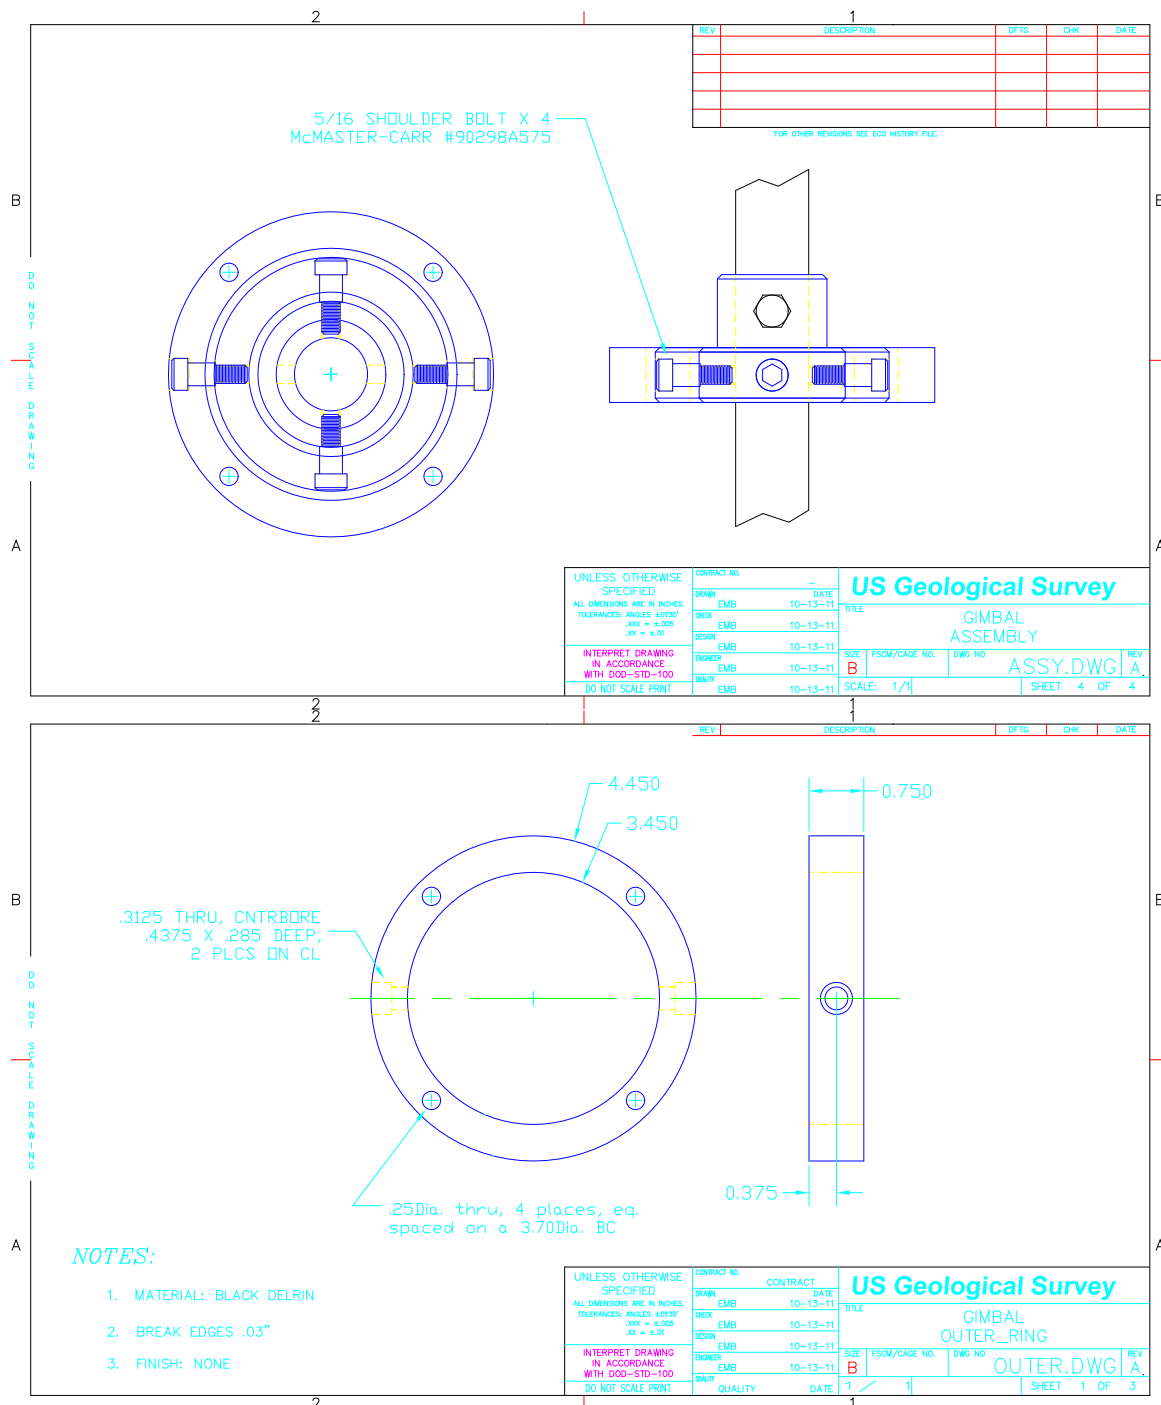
Design drawings for the gimbal: assembly and outer pieces. Design and construction by E. Bergeron, USGS Woods Hole.
